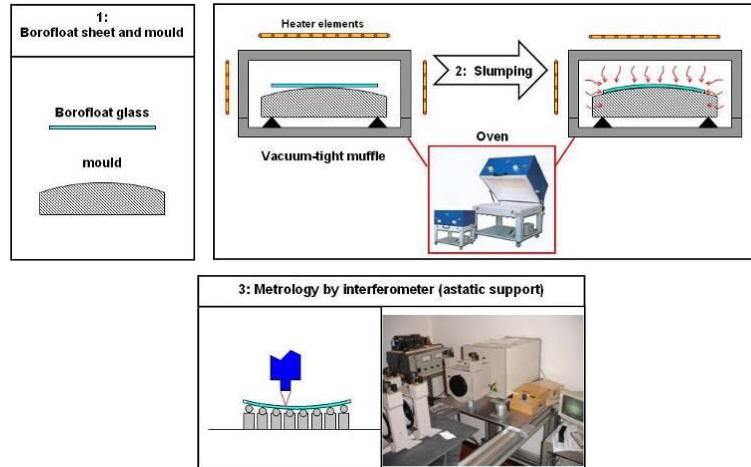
Hot Slumping technique concept for the manufacturing of thin mirror shells.
